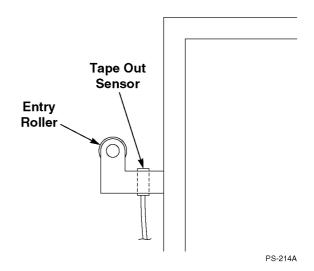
Tape Out Sensor Adjustment (Left-Hand Applicator Shown)
